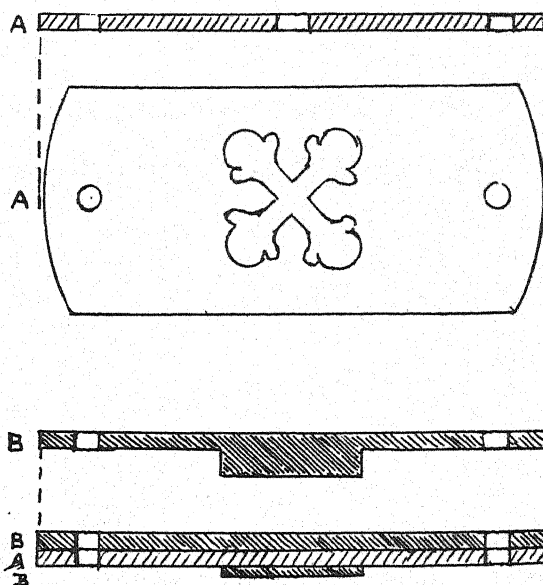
Pattern-plate "A" and pressing-plate "B."
